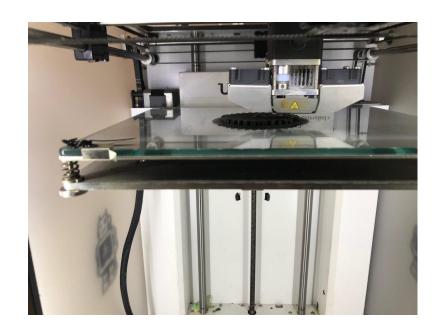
PINION GEAR IN A 3D-PRINTER
